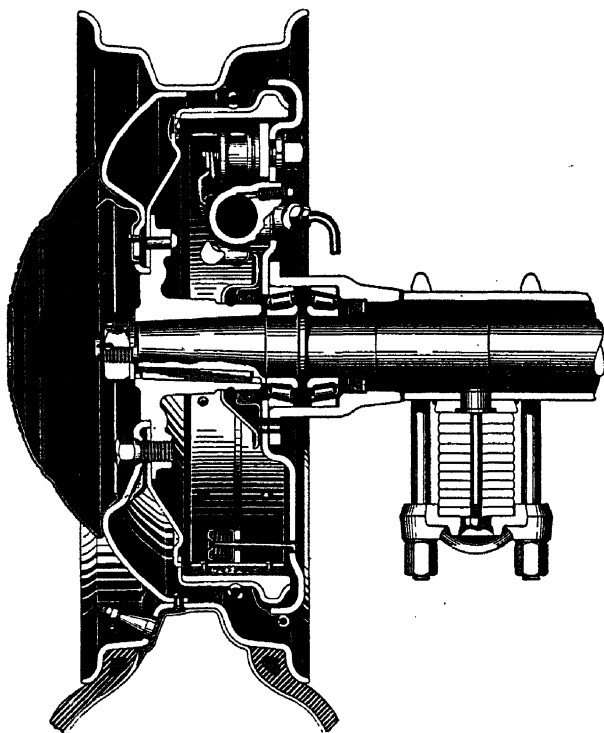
Pressed Steel Rear Wheel for Large Car.
